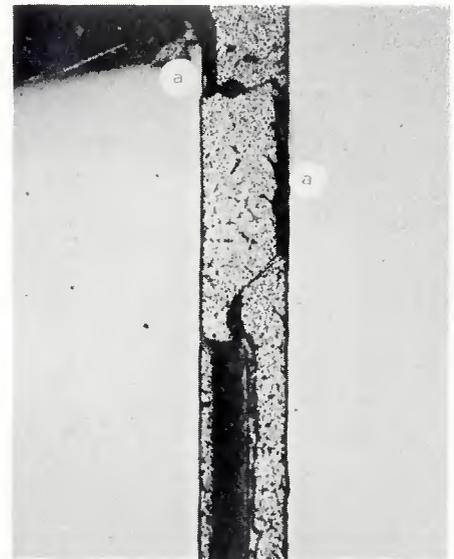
Failure in Type III joint due to non-wetted surfaces shown at (a)
